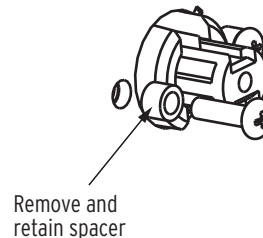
Remove Spacer and Reseat Screw to Disable Locking Mechanism
